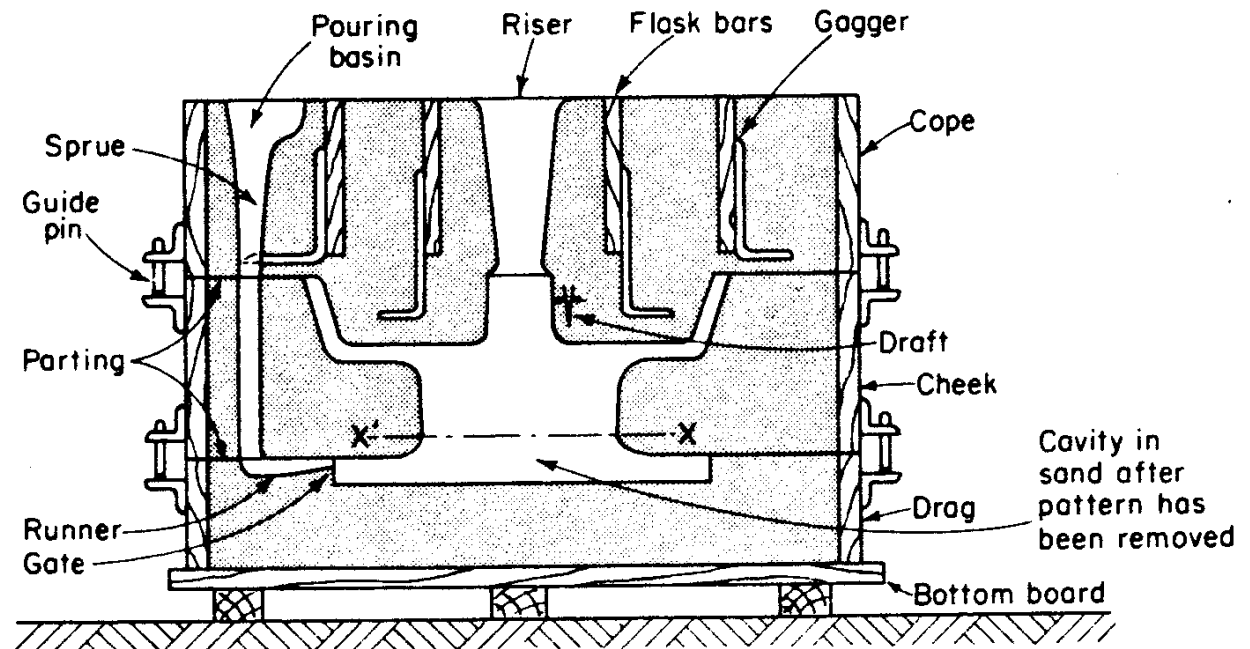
A cross-sectional view of a three-part sand mold, with the parts labeled. The line X'-X indicates parting in the pattern.
